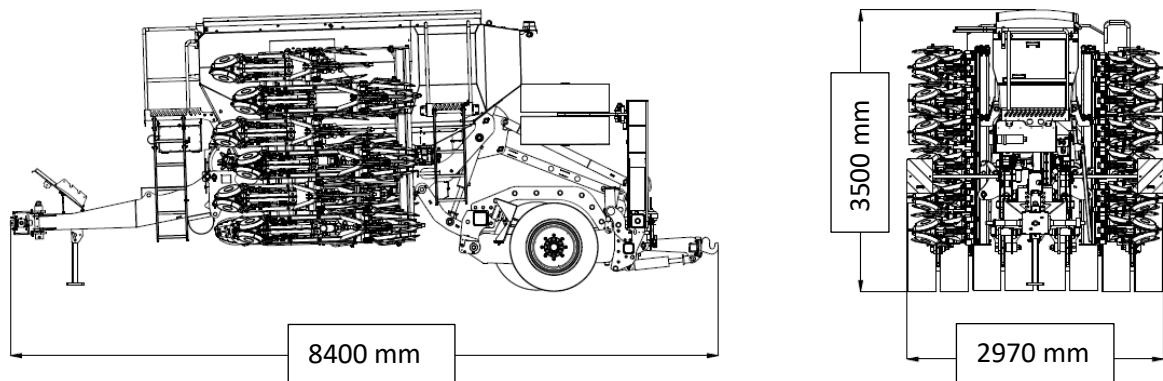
Overall dimensions of the 4,5 m machine without attachment.
